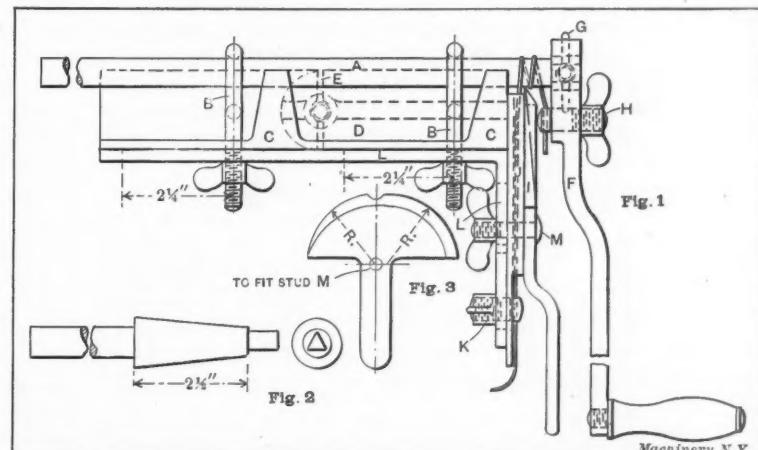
Plan View of Spring Winder. Fig. 2. Arbor used for Winding Conical Springs. Fig. 3. Spacer used for Winding Conical Springs
